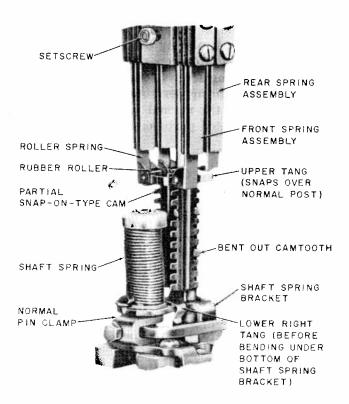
Normal Post Spring Assembly Having Rubber Rollers Operated by Partial Snap-On-Type Cam
